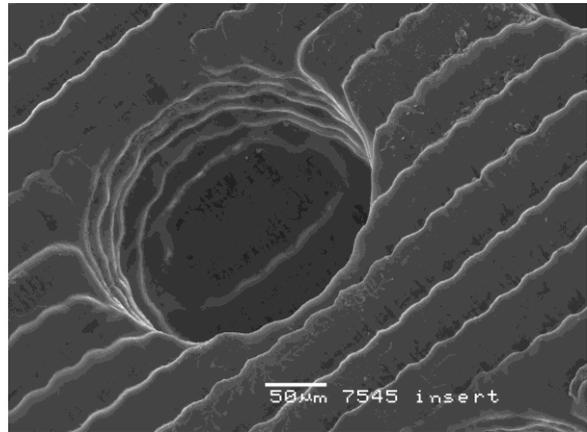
A properly cleaned 200 µm hole in a printed insert.
